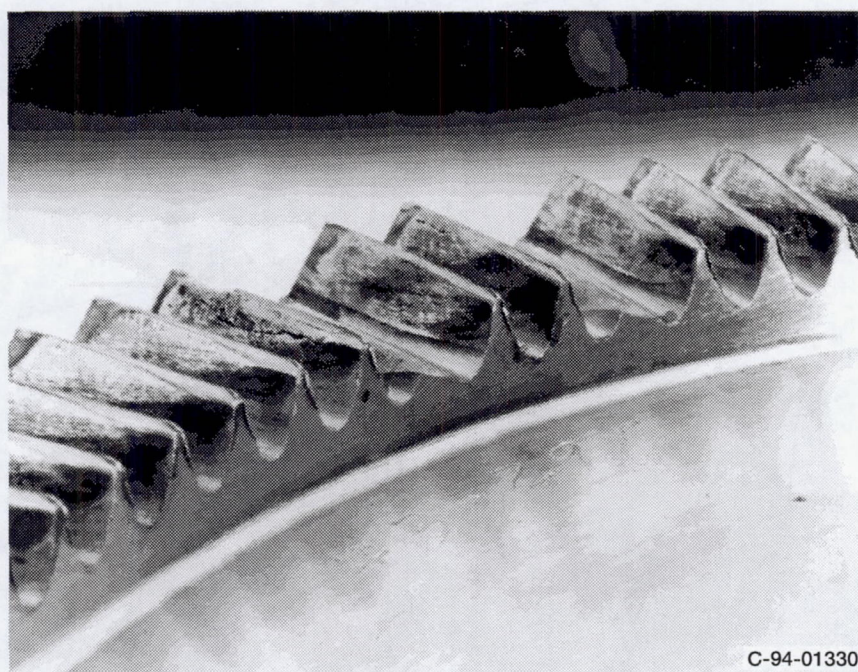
Sample of pitting and tooth fracture damage on face gear fatigue rig (face test #5).
